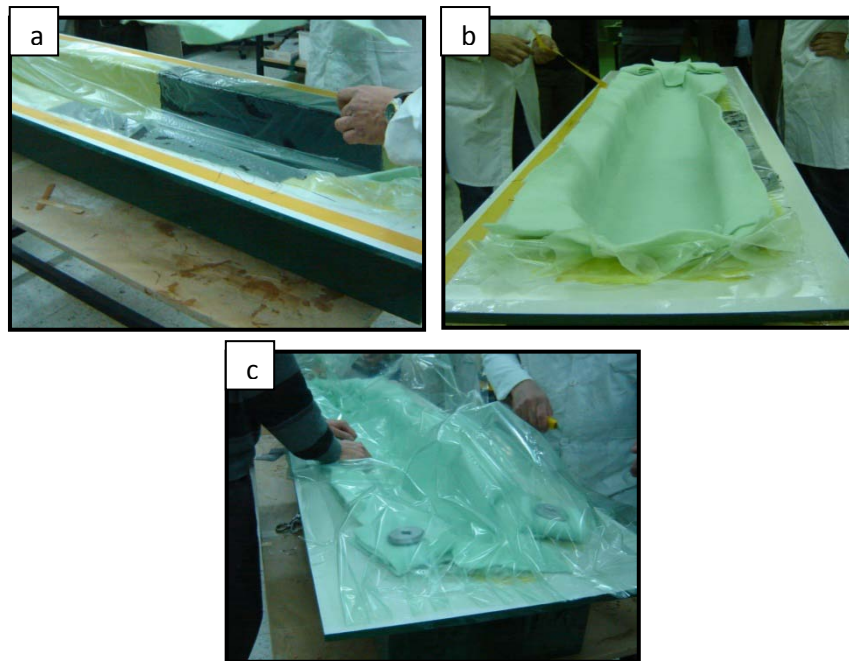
Positioning punctured foil to prevent adhesion (a), Positioning composite blanket to remove extra resin (b), Covering the mold with vacuum bag (c)
